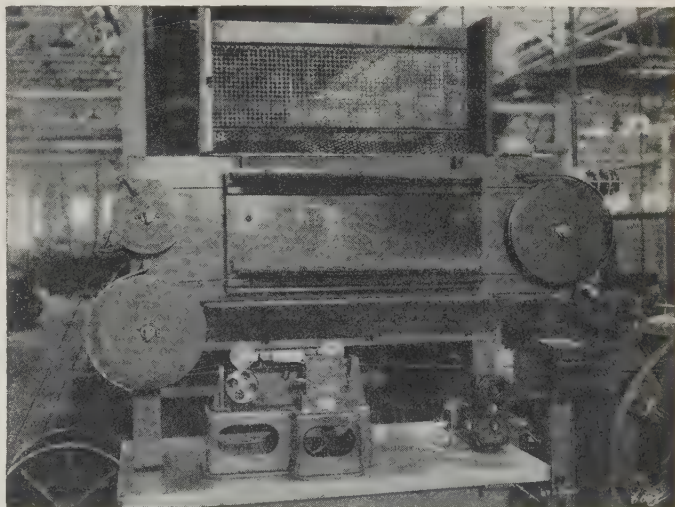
Spark testing electrode, stop counter, combined wire distributor, and fault locator
